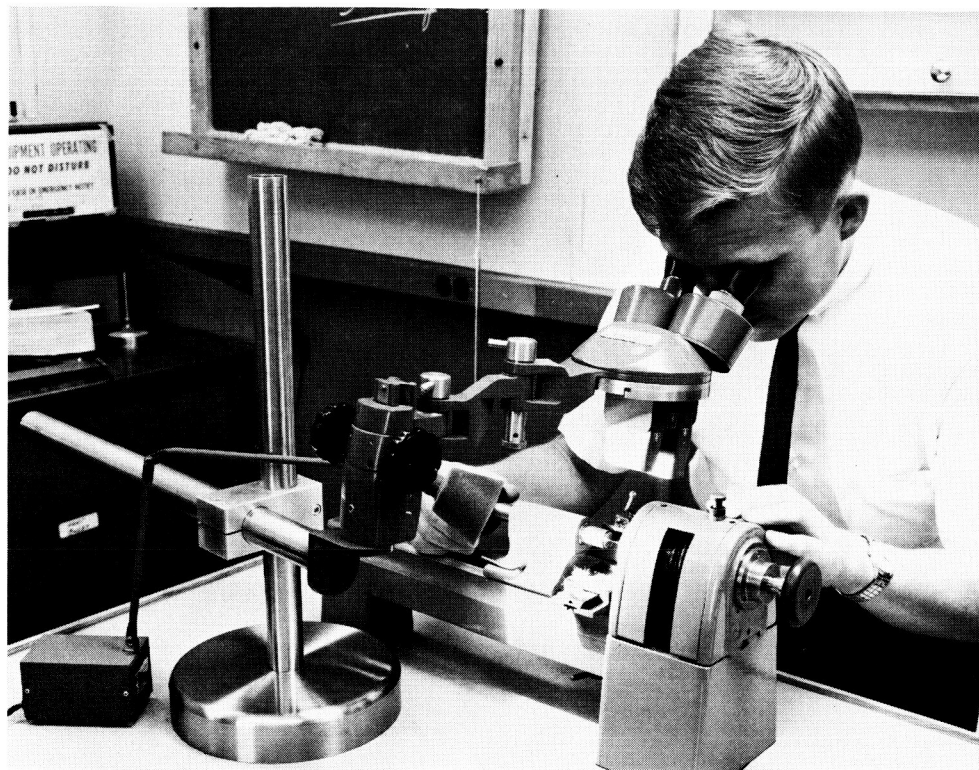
Jeweler's lathe and magnifying lenses essential to transducer construction
